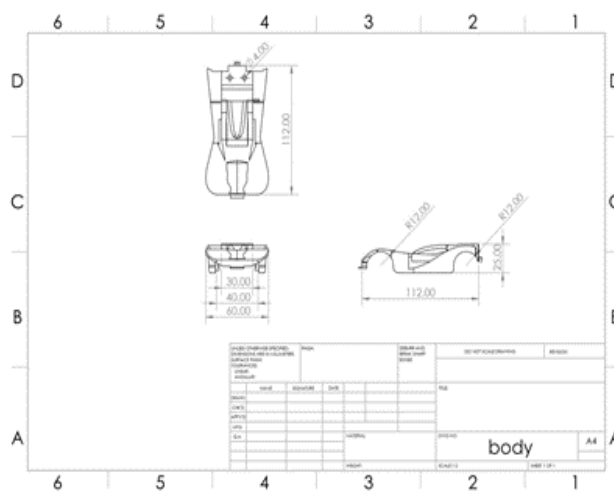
Mini 4WD Model Kit Body Technical Drawing
